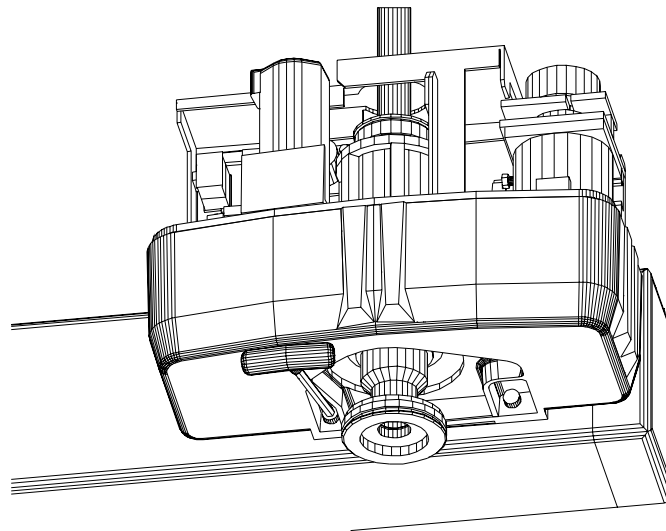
Attaching the Z-Theta to the Y-Axis
